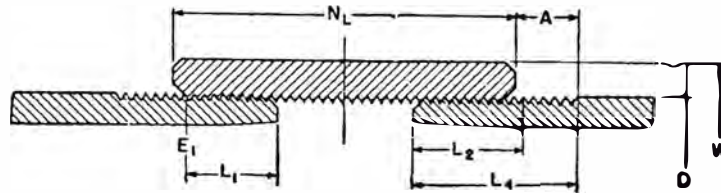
Dimensions of Hand Tight Assembly for Use with Table X3.1
